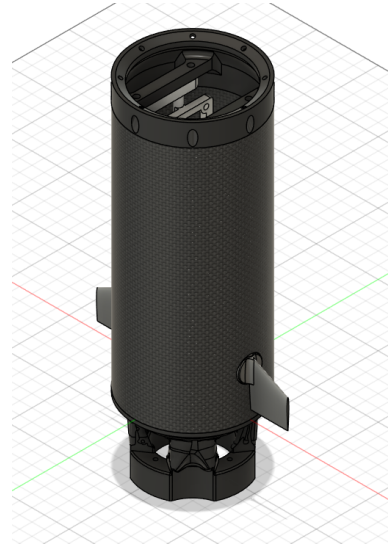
Outer housing for the ARC section with the control surfaces mounted
